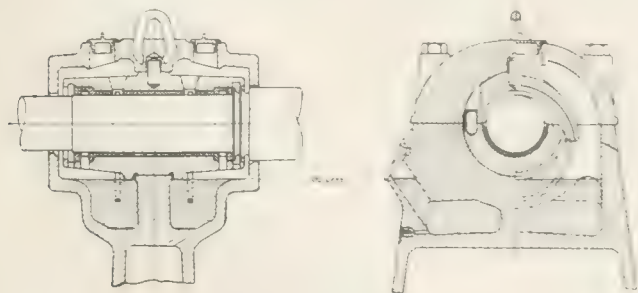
SECTIONS SHOWING PRINCIPLES OF CONSTRUCTION IN A MODERN TYPE OF BEARING
